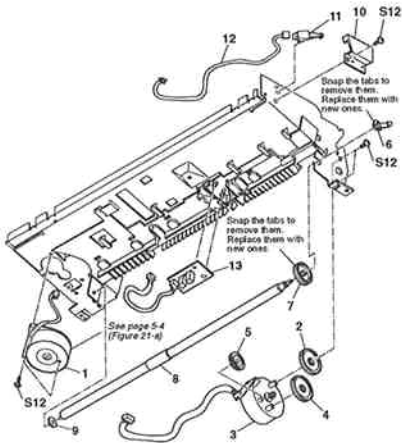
CARRIAGE GUIDE & PRESSUER PLATE
